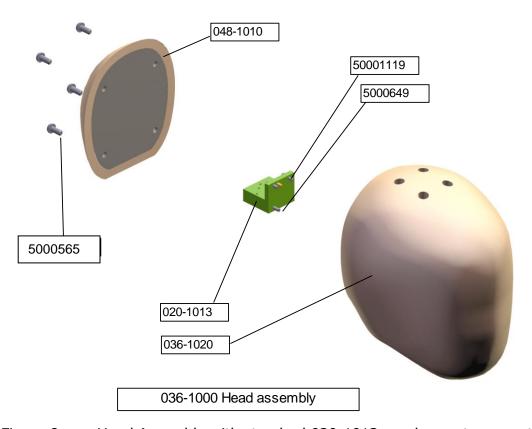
Head Assembly with standard 020-1013 accelerometer mount
